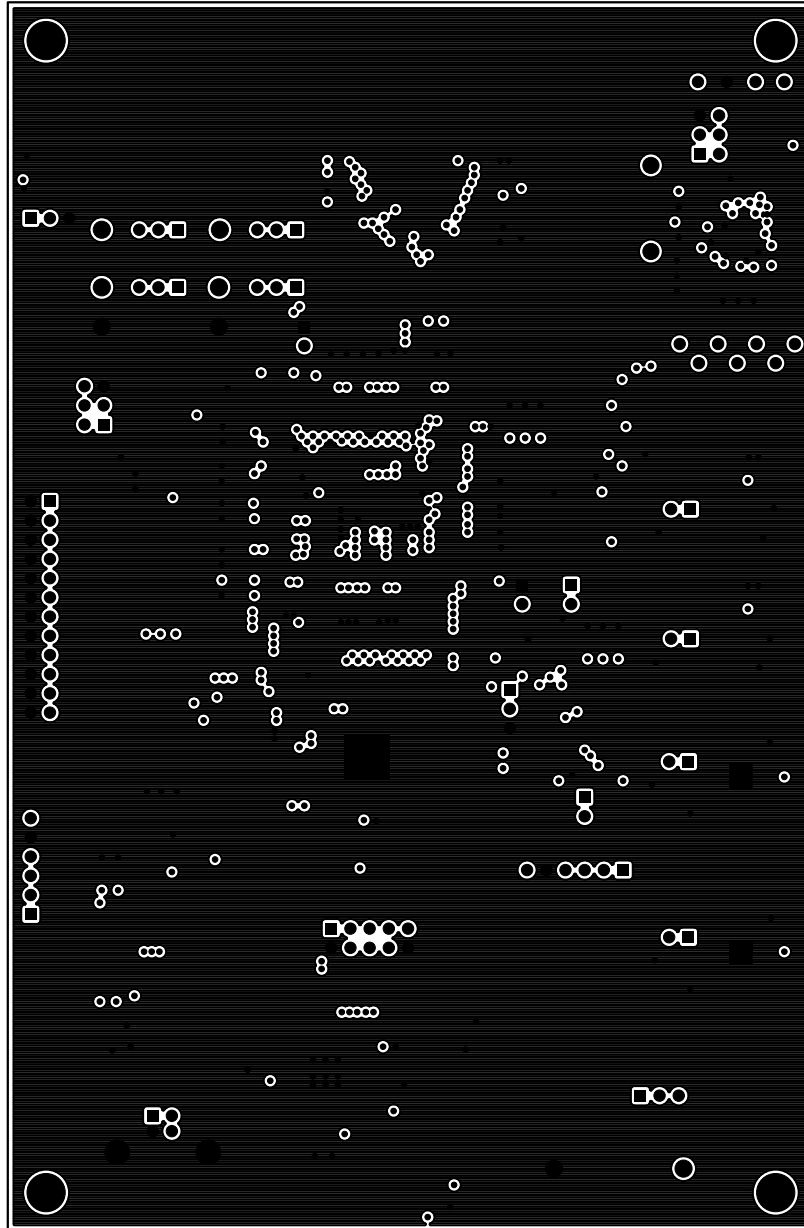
MAX44006 EV Kit PCB Layout—Layer 2
